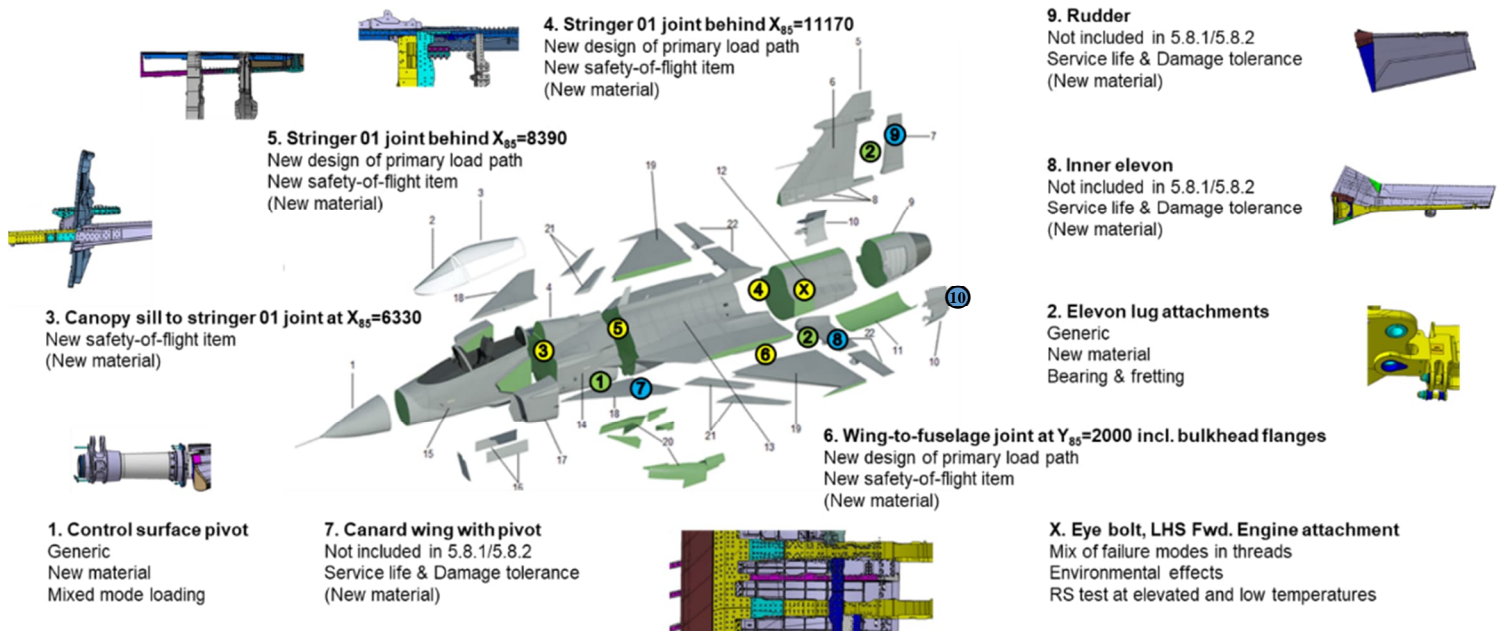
Full-scale damage tolerance tests of assemblies having artificial defects installed.
